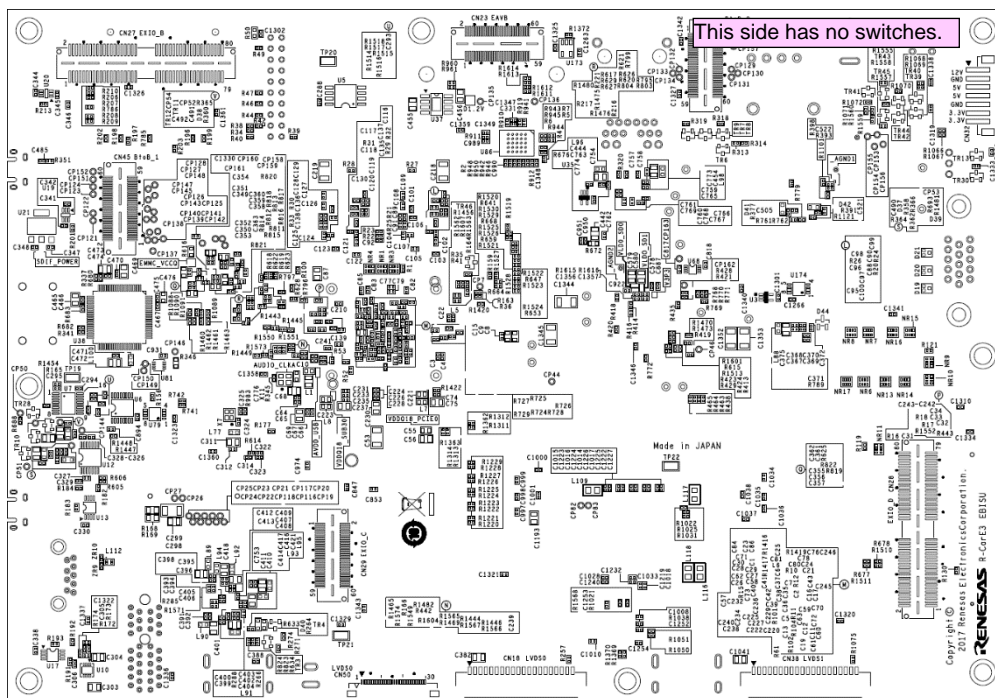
Location of Switches on the Ebusu Board (Solder Side)
